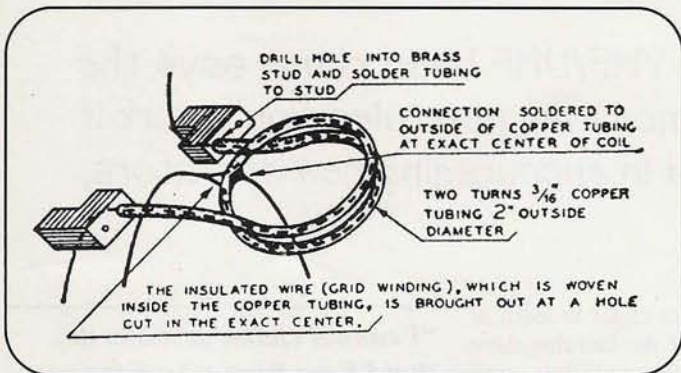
Assembly details of the plate coil with the grid coil inside it. Details in text.
